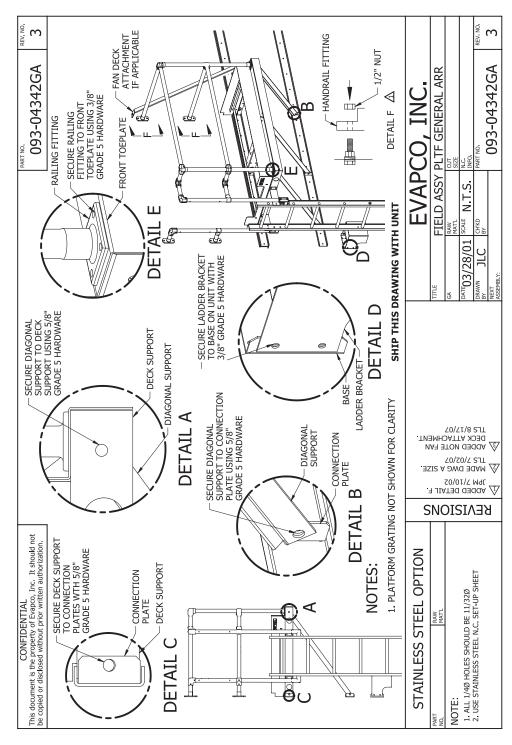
Field Assembly of Optional Working Platform and Ladder
